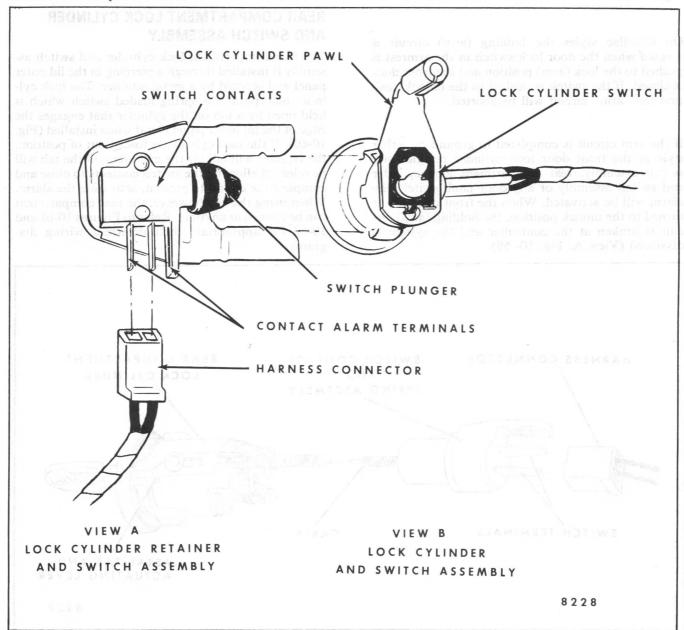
Front Door Lock Cylinder Switch Assemblies
